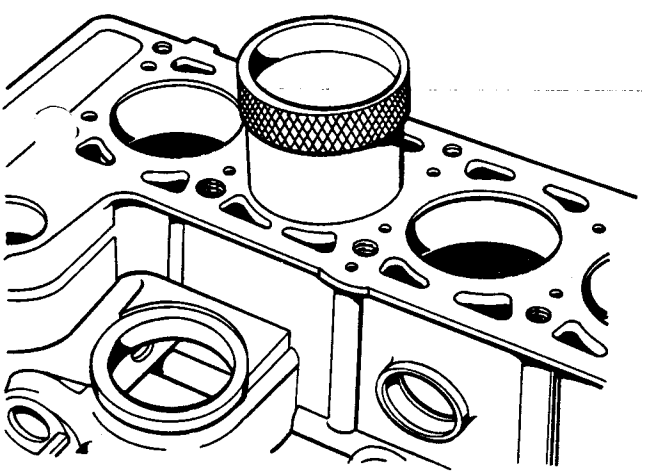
Installing Piston with Piston Rings into Cylinder with Piston Inserter Bushing from Set 2.7854.9500
